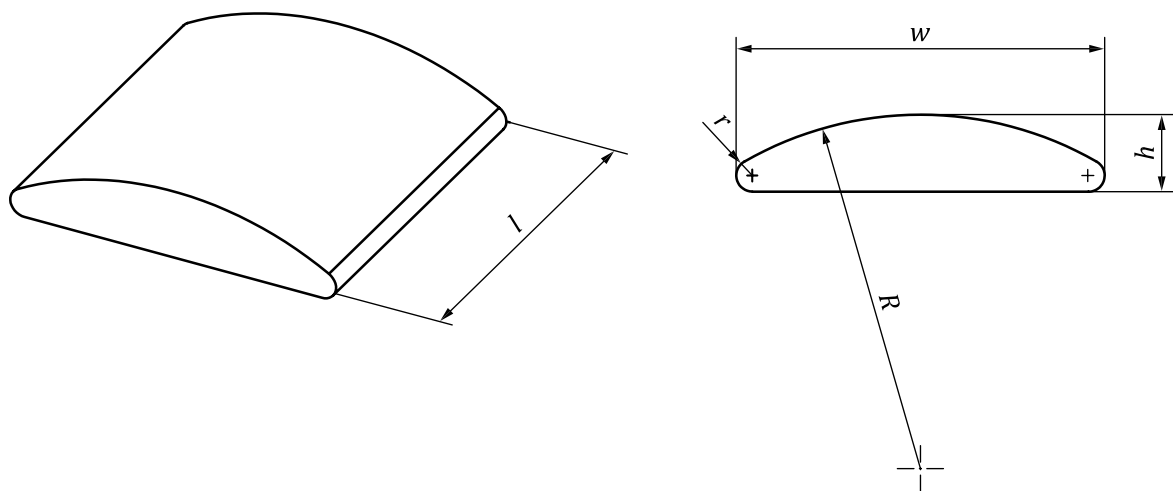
Pelvic loading pad (dimensions specified in Table 1)
